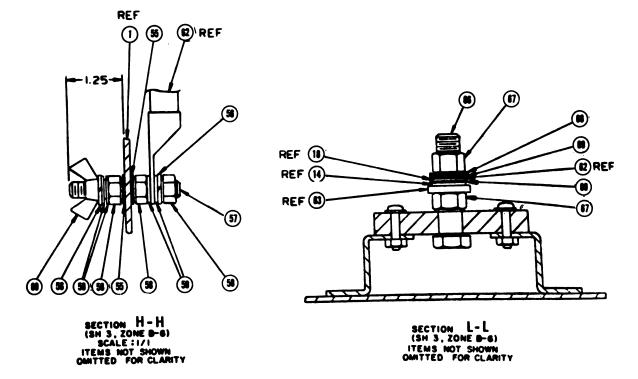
Switchbox Assembly (Sheet 3 of 7)
